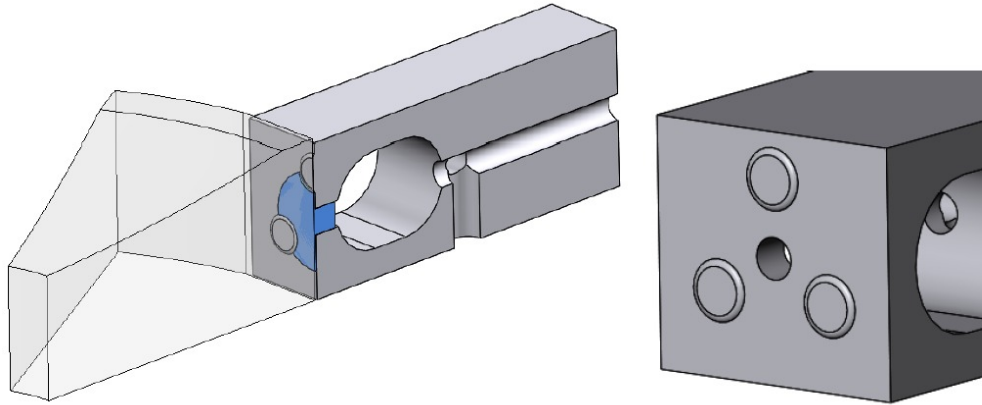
Cross sectional view of a mirror segment and mounting tab with adhesive, the three contact bosses, and the center hole for applying bonding.
